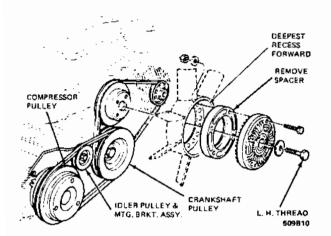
Compressor Pulley, Idler Pulley and Mounting Bracket Assembly
